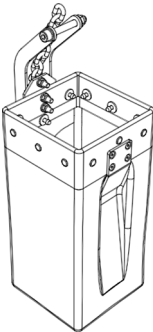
Brake, Gears, and Load Suspension Components – 3 through 6 Ton
